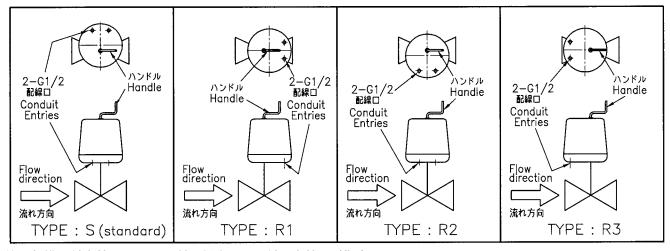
ACTUATOR MOUNTING FORMS FOR 5200LA
